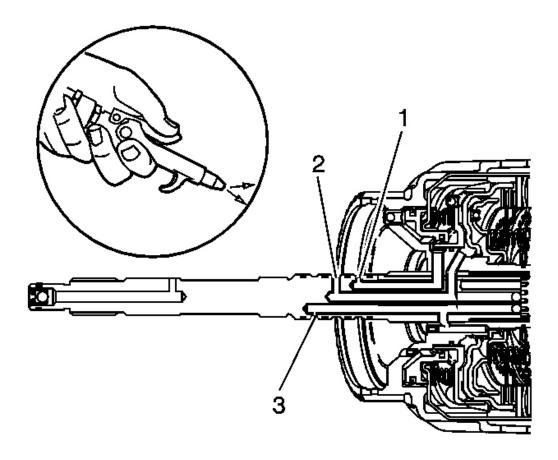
Applying Air Into Feed Holes Courtesy of GENERAL MOTORS CORP.
